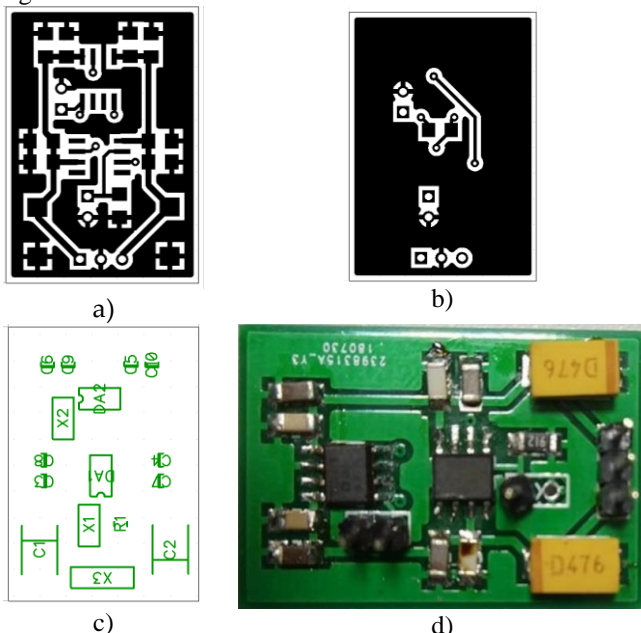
Upper (a) and lower (b) layers of the printed circuit board, assembly drawing (c) and appearance (d) of the CS
